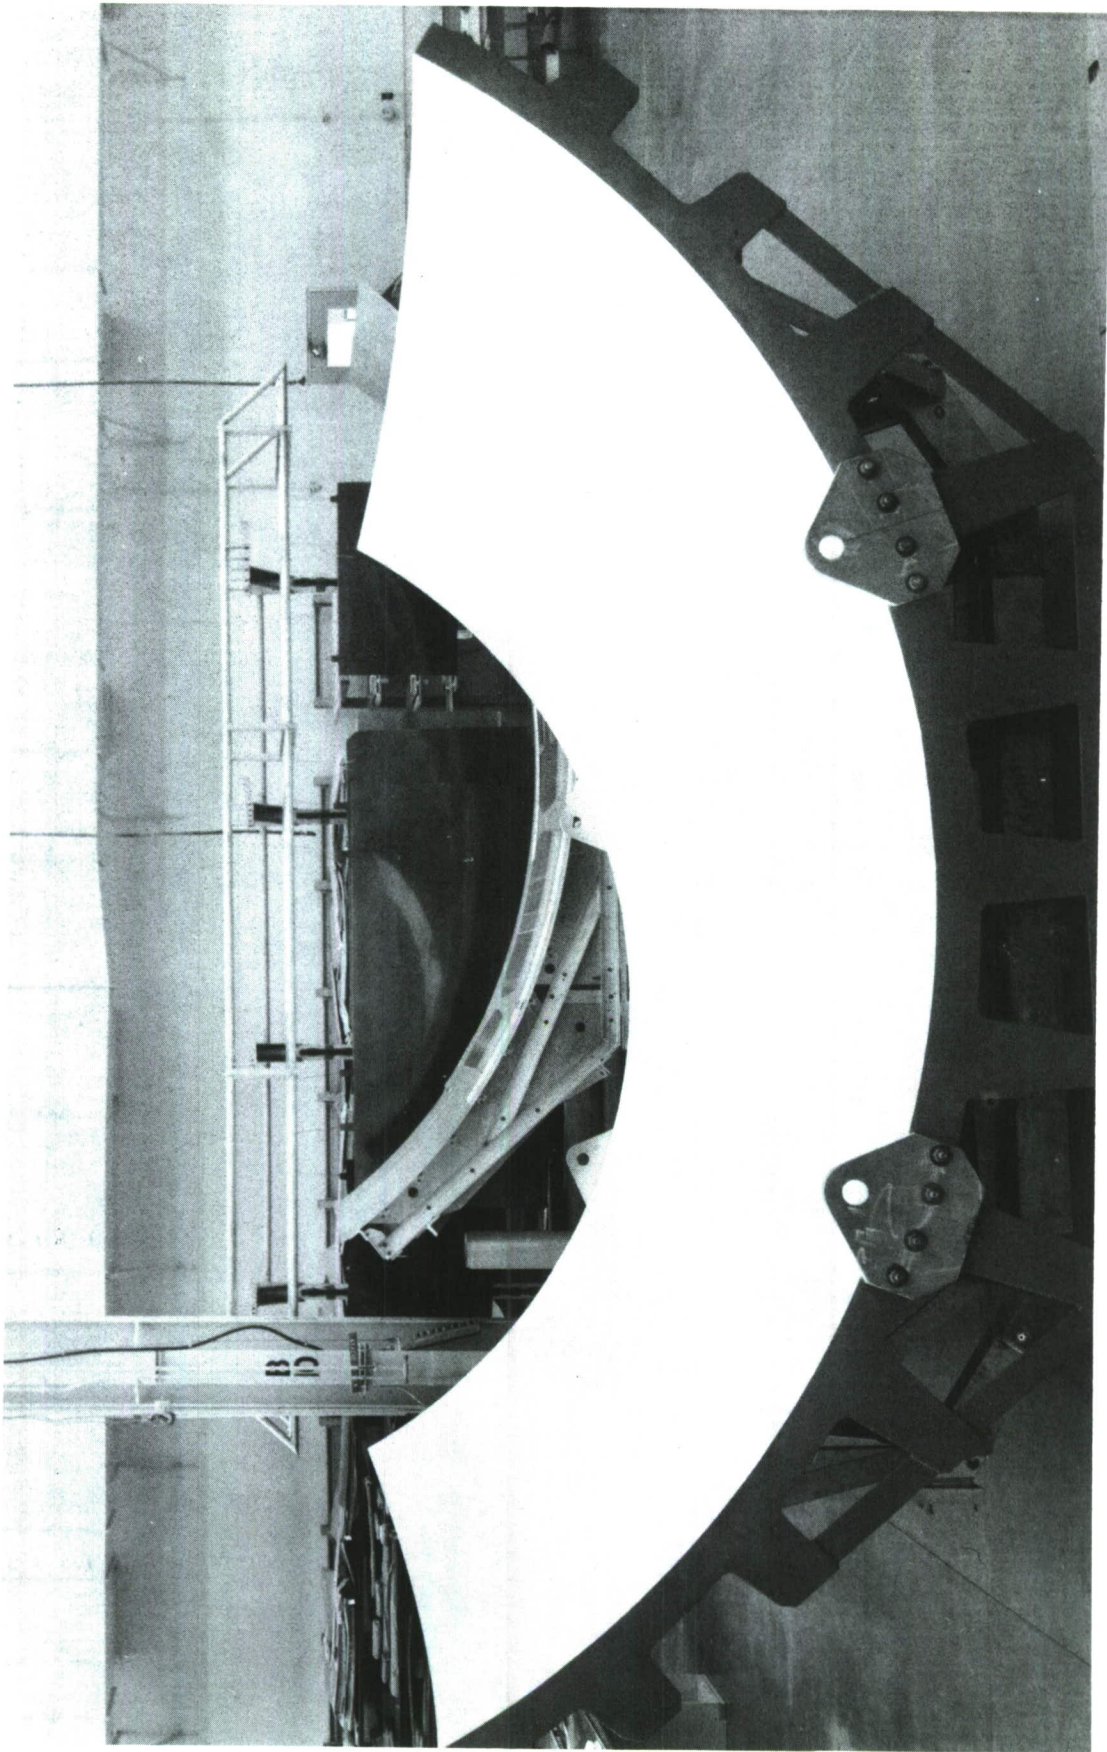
Completed Cast Aluminum, Compound Contoured Bonding Assembly Jig
